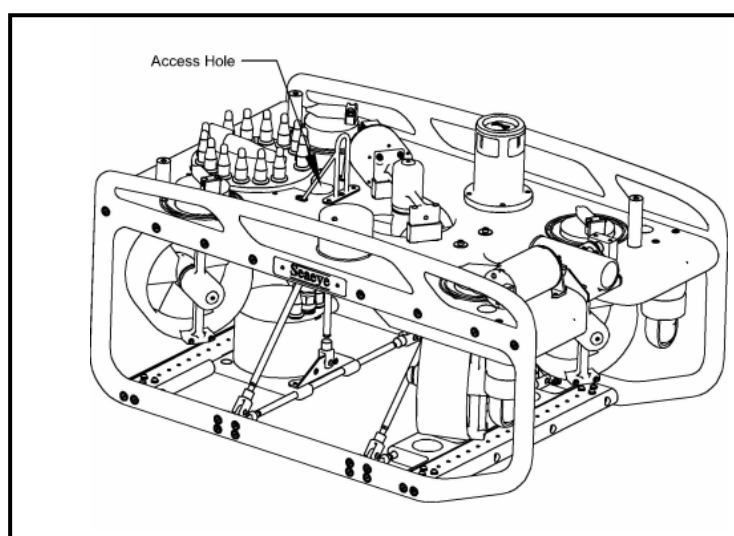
Location of the Access Hole (Top Fairing removed for clarity)
